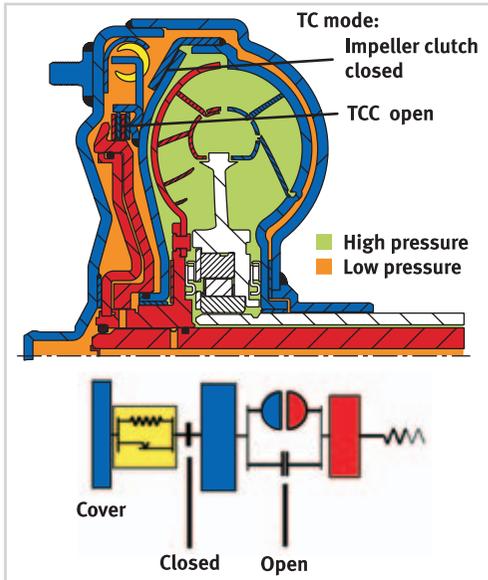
Engaged impeller clutch provides conventional torque converter operation
